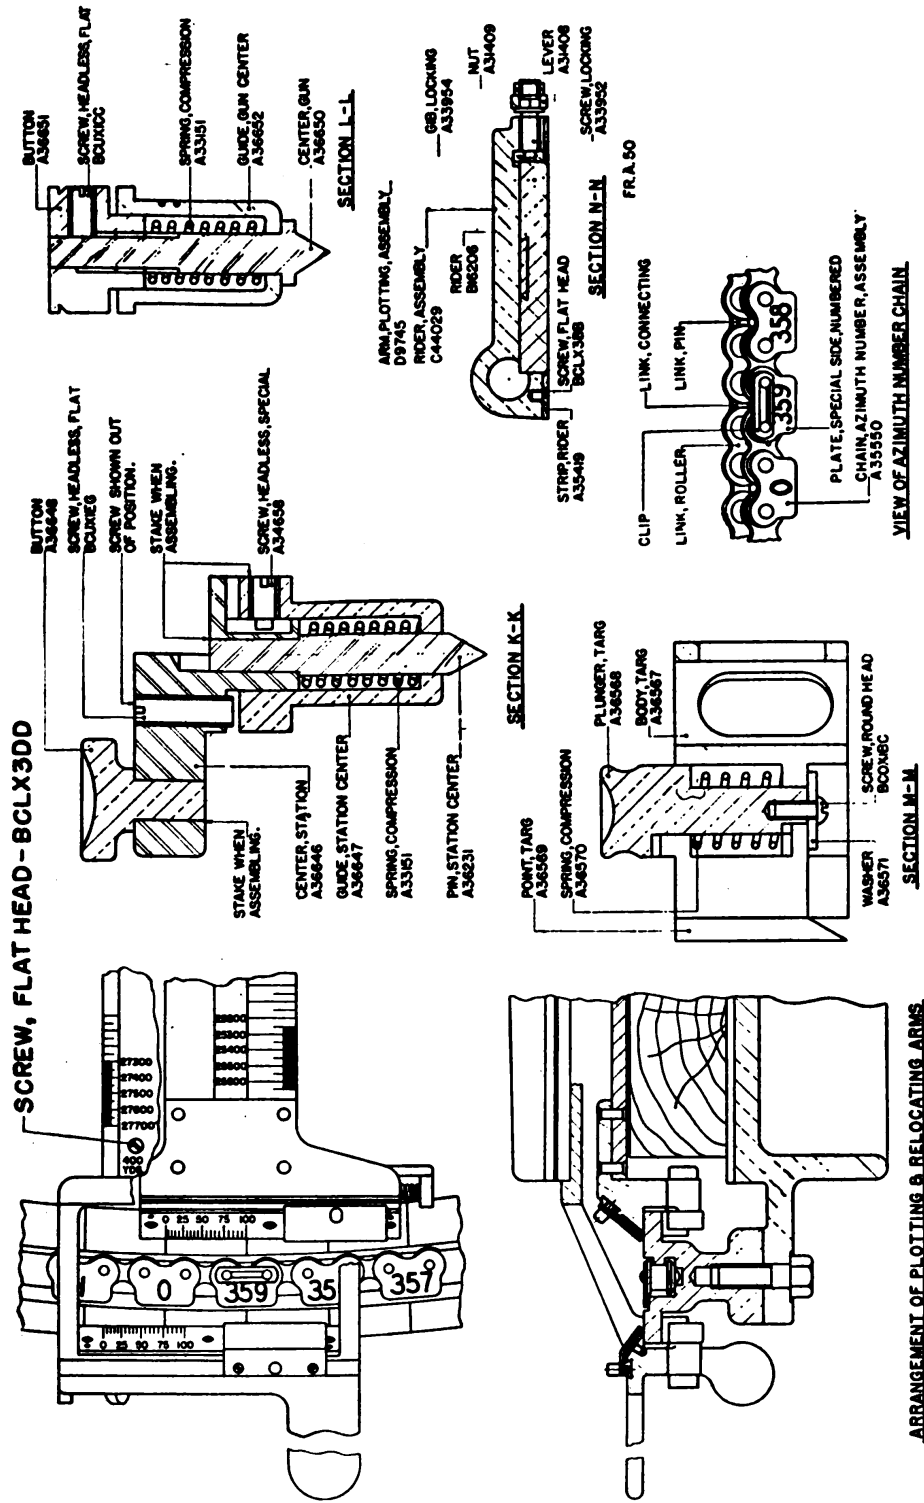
Plotting and relocating board M1—sectioned views.
